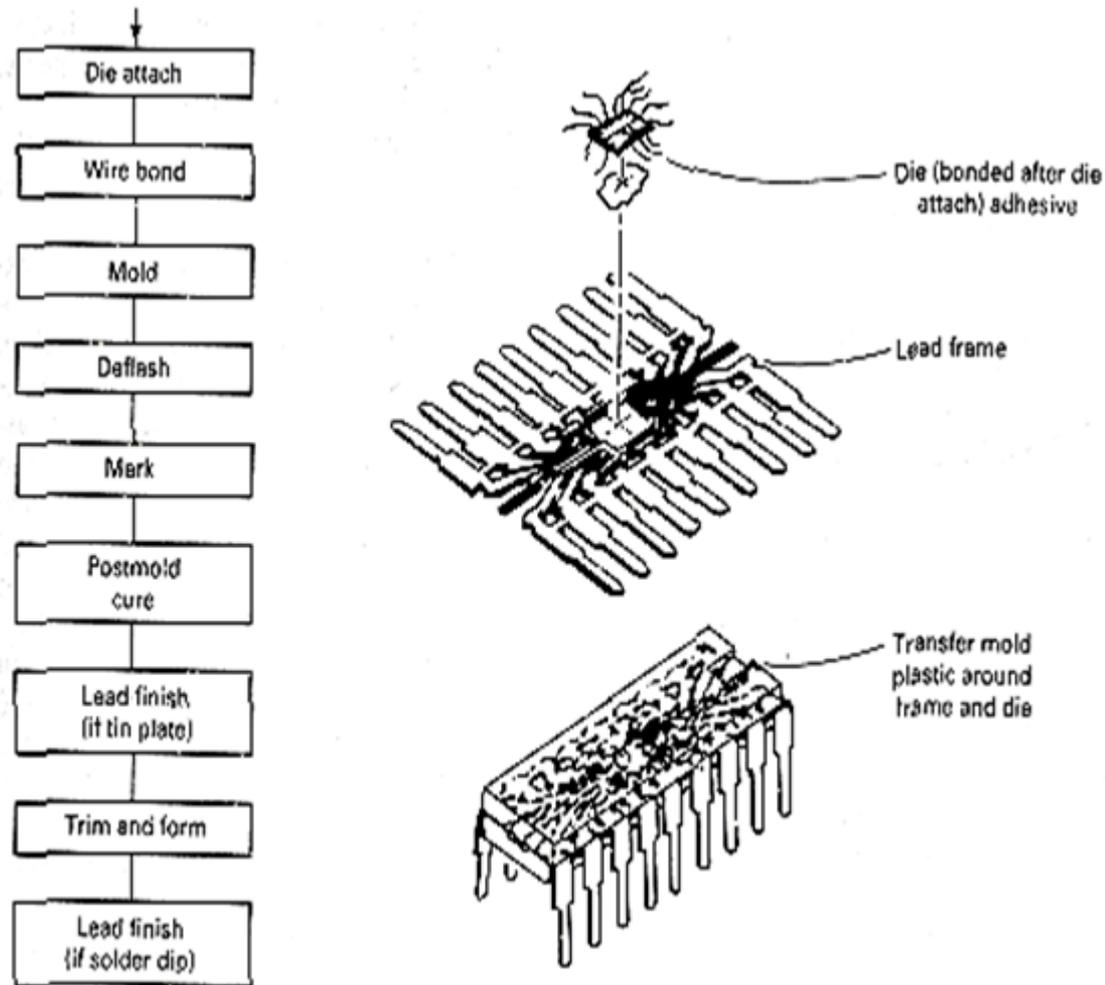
Assembly sequence for plastic postmolded dual-in-line package. The lead frame serves as the chip carrier after die bond and wire bond.
